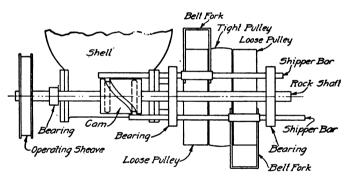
Details of Cylindrical-Cam Belt Shipper Shown in Fig. 41
